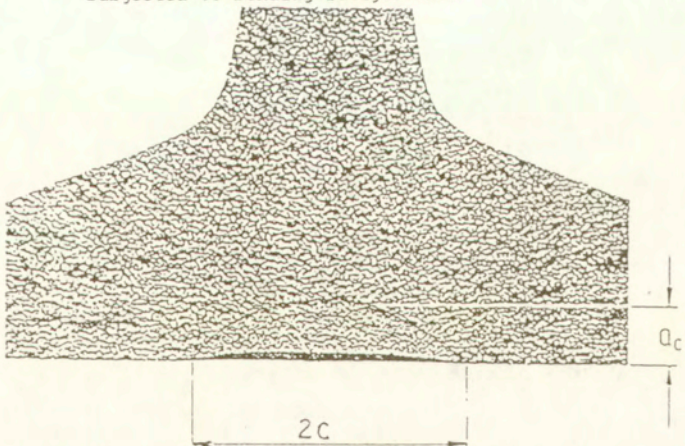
Method of measurement of critical size of the fatigue crack
